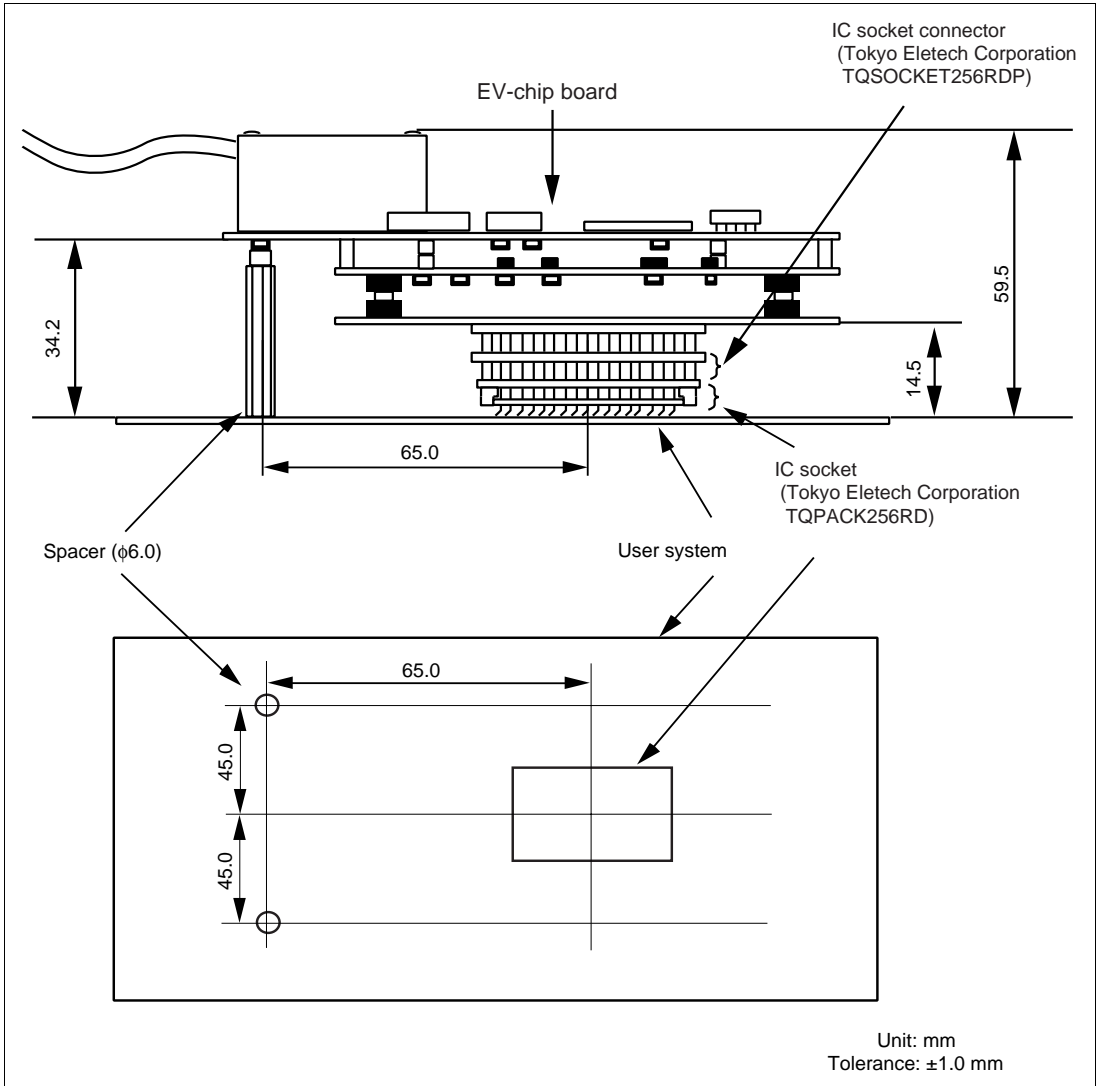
Resulting Dimensions after Connecting User System Interface Board
